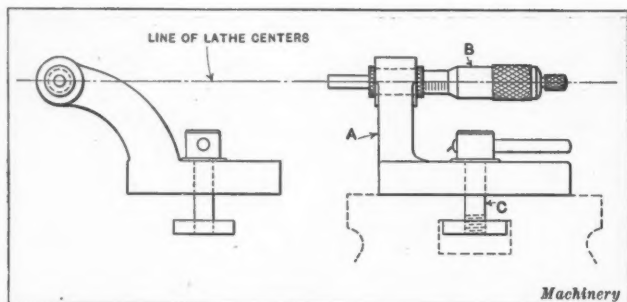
Bracket for mounting Micrometer Head on Tool-slide of Lathe
